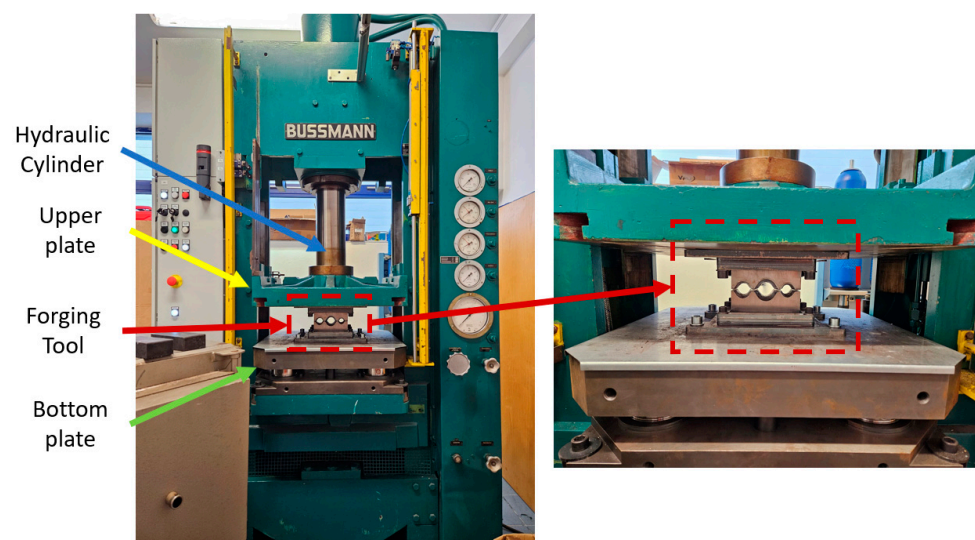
The physical twin of the Bussmann Hydraulic Press HPK100 with the forging tool.
